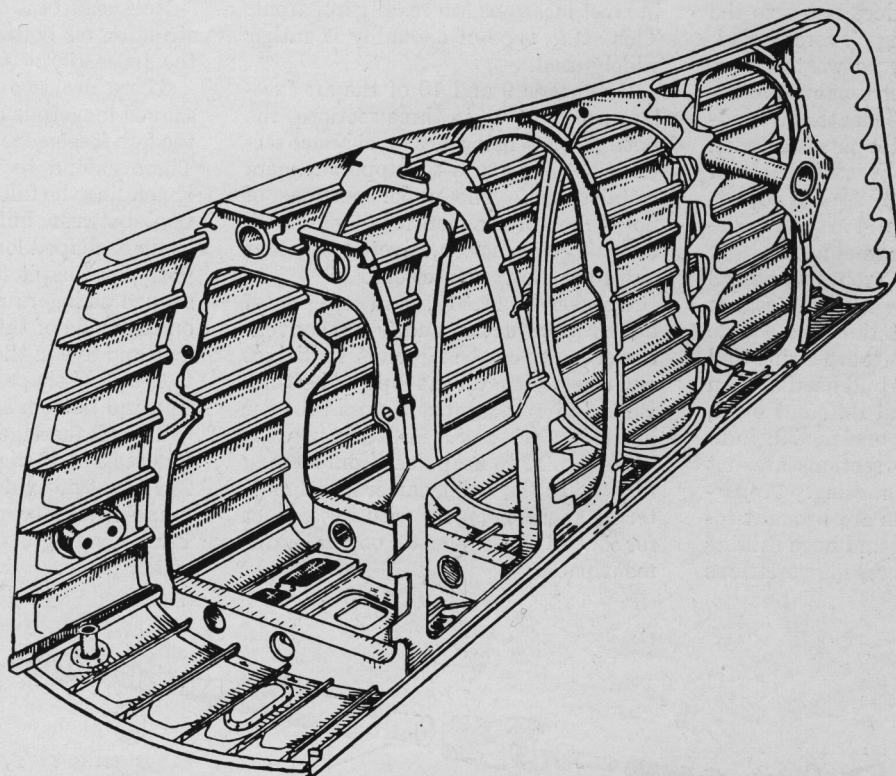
Cutaway view of the aft fuselage section, from the point where it is attached to the fore section by double row rivets, aft to bulkhead 14, where the empennage is bolted to it. Bulkheads 9 and 10 are built up in three sections, riveted together. The tops of the bottom sections are flat to accommodate camera installations. A fabric panel is set in bulkhead 12 to prevent dust from seeping forward into the fuselage. A tube mounted in No. 13 provides for the lifting bar.
